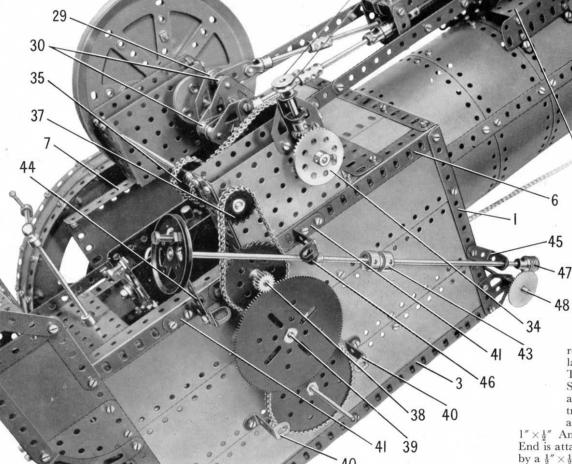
The off-side of the Traction Engine with the rear wheel removed to reveal the drive to the back axle
